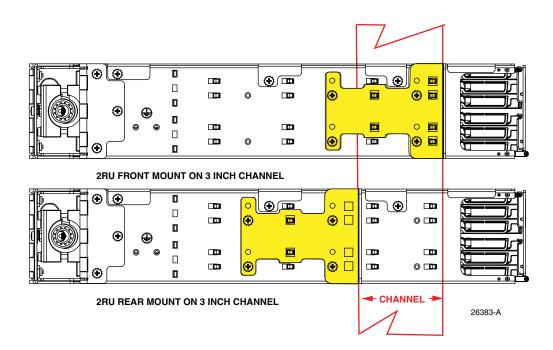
2RU Mounting Bracket Positions (Front and Rear on 3-Inch Channel)
